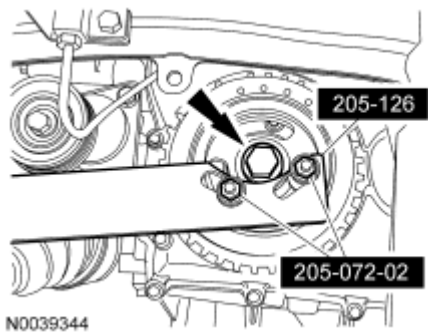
Identifying Special Tools (205-126 And 205-072-02) & Crankshaft Pulley Bolt
